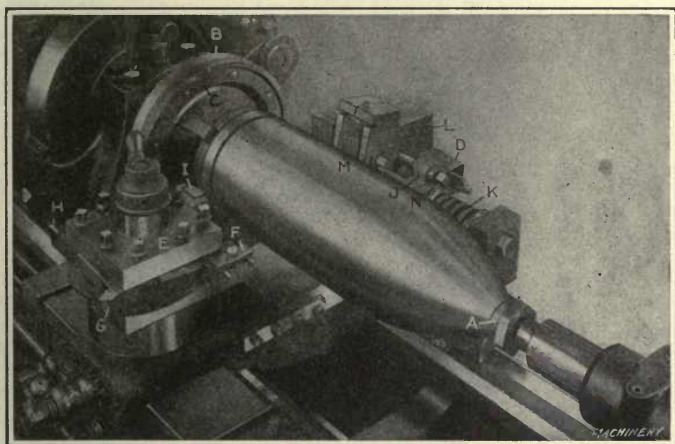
Set-up on a 24-Inch Engine Lathe for machining Band Groove and cutting Wave Ribs
